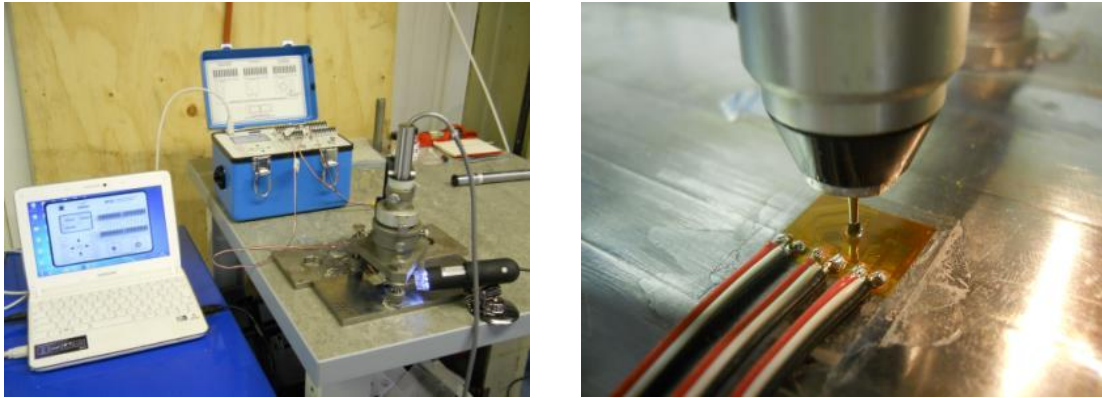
Hole drilling set up for 1mm (left) and hole drilling test (right)
